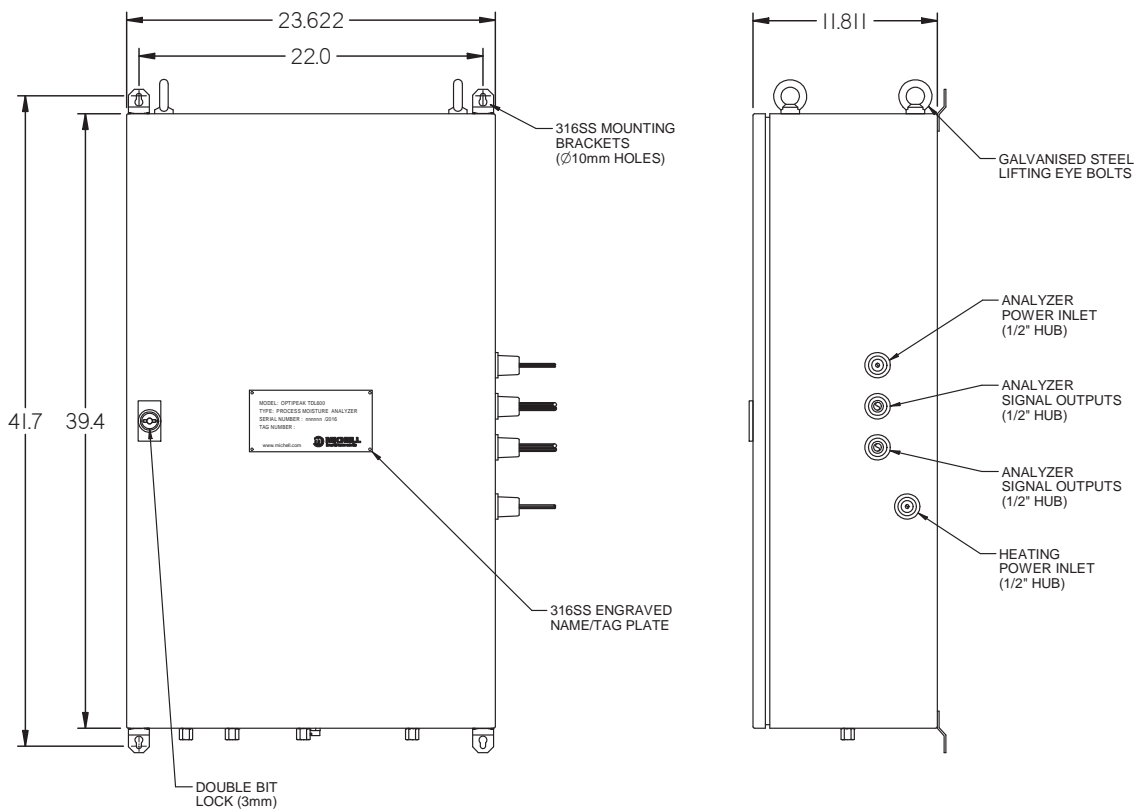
Dimensional Drawing - Outdoor System Enclosure
